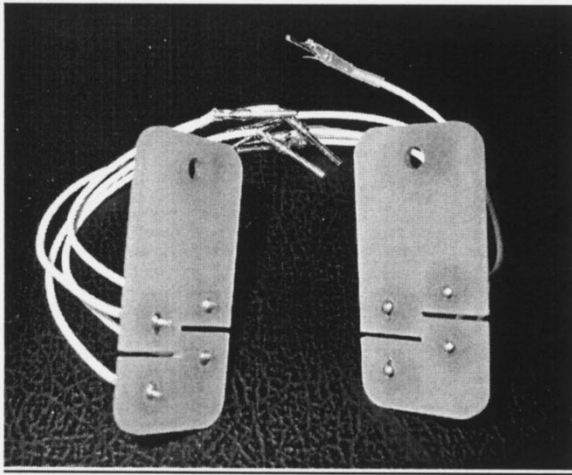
Example of the two types of solder fillet geometries realized on PCB: (right) sample round abundant shape (RAS) and (left) pointed shape solder (PSS). On each sample there are two type of copper pads: circular and sharp shaped. For the latter, sharpness was obtained by designing the pads with a triangular arrow tip with angle about 57° . The dark colored areas surrounding the soldered terminals are the positions of epoxy that is used to "pot" the wires and cover the insulation clearance on the wire side of the PCB.
